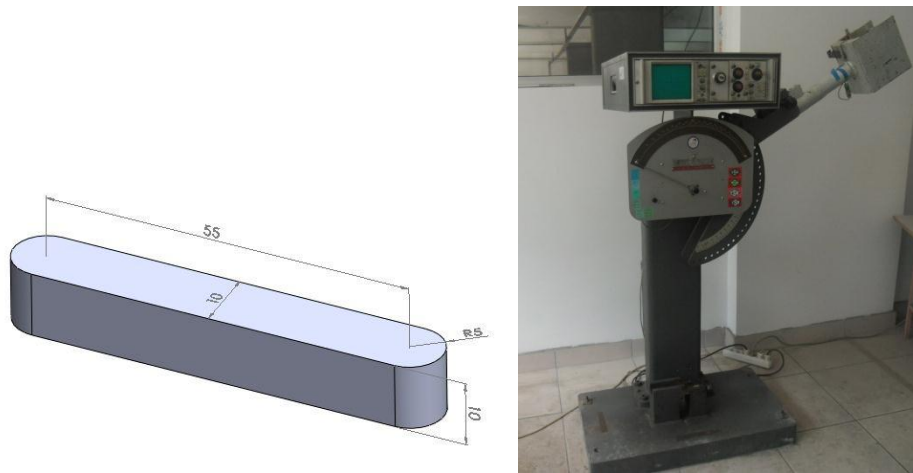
(left) Geometry and dimensions of Charpy impact test sample, (right) Charpy impact test machine used in experiments
